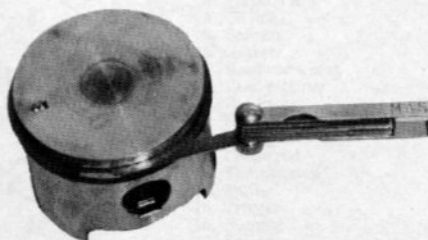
Ring side clearance in groove should be measured with feeler gage as shown. Clearance should be within recommended limits and the same all the way around piston.
